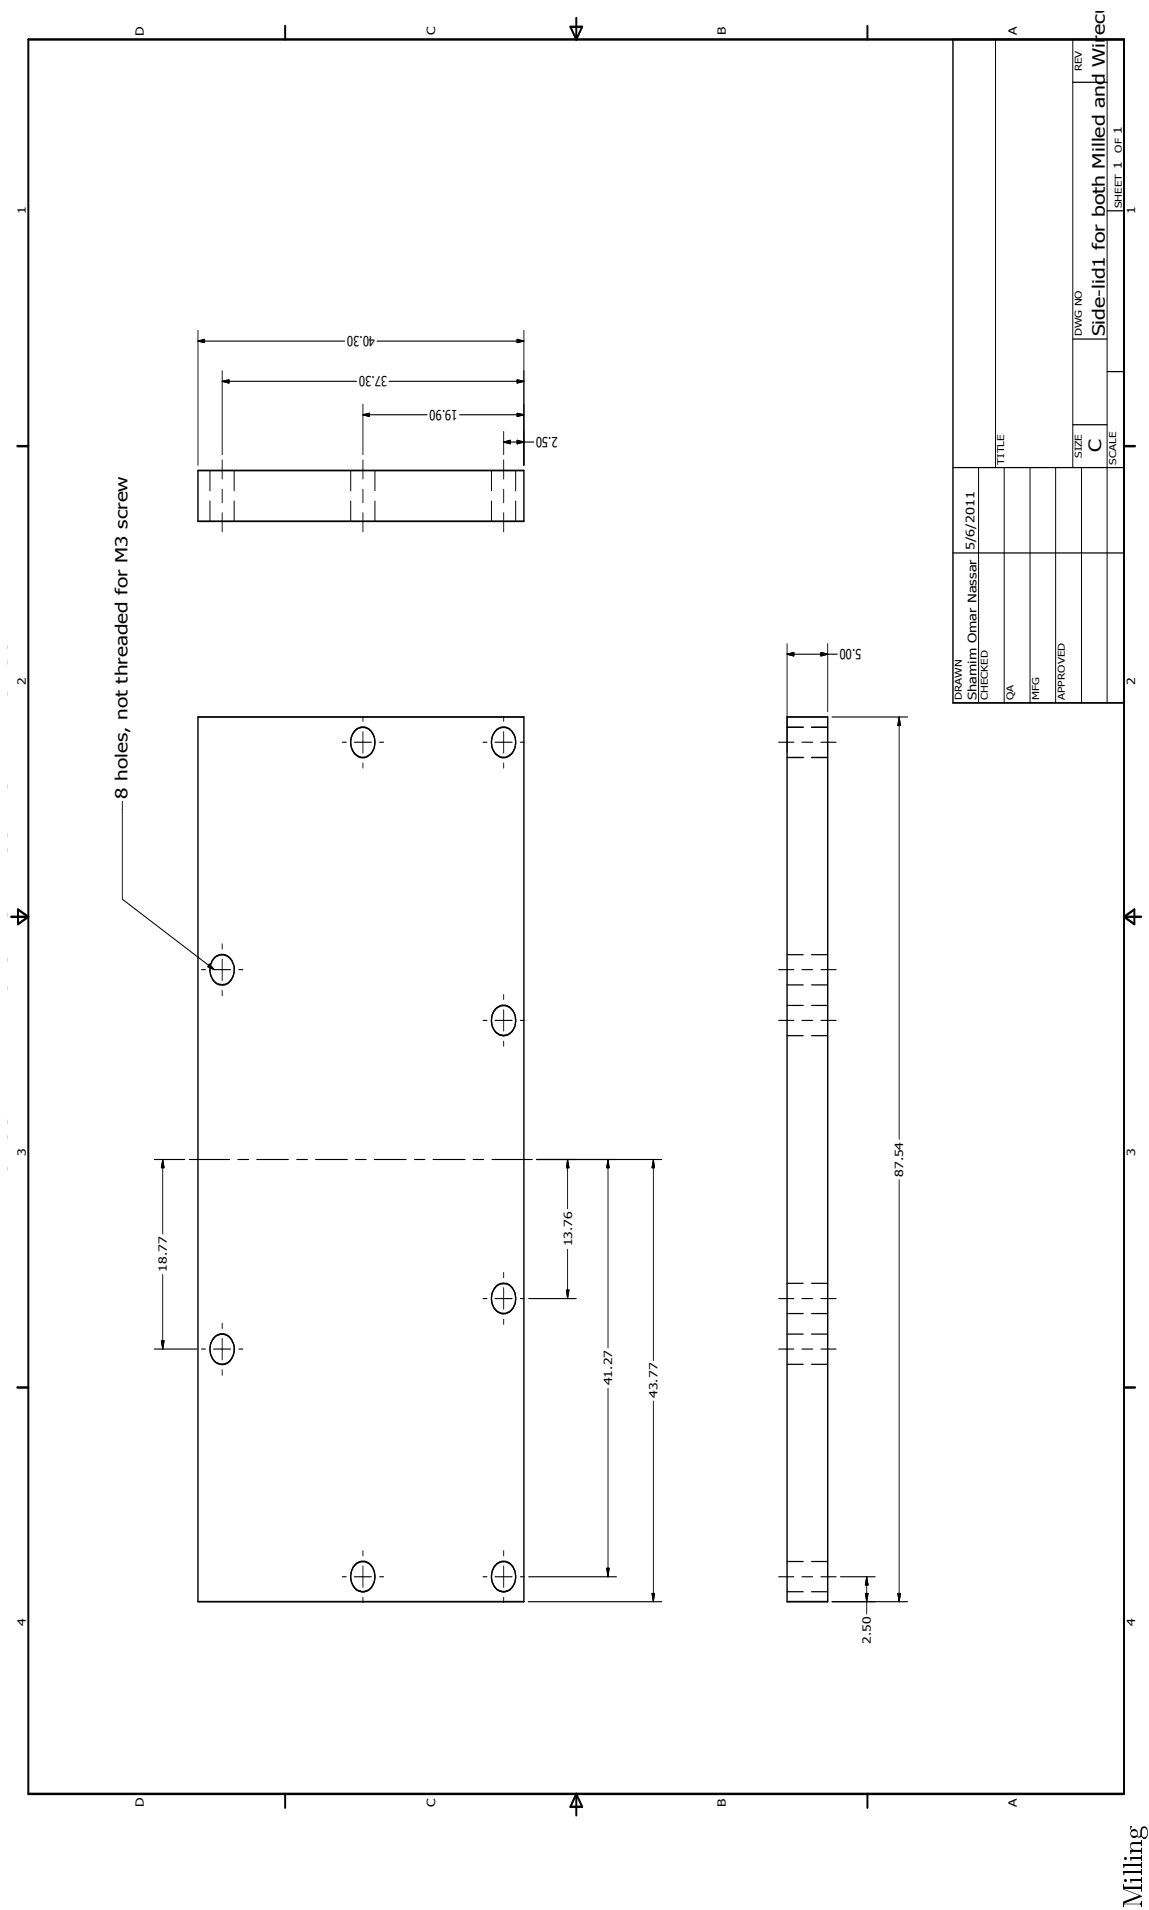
1.3GHz Combine Filter Sidelid Dimensions with Unthreaded Holes - Milling Option
